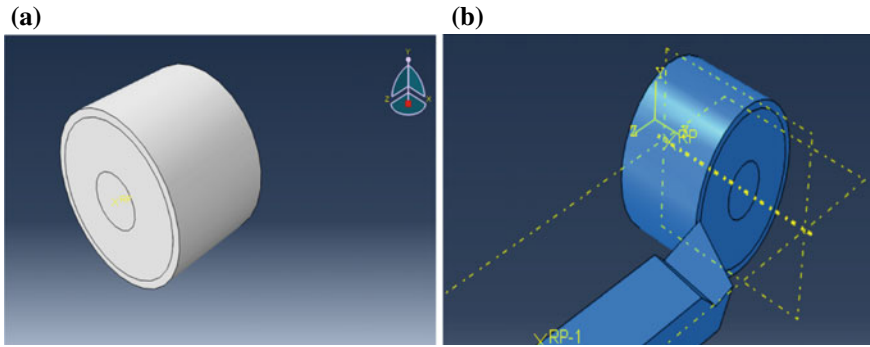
a Partitioned regions in the workpiece and b assembly
